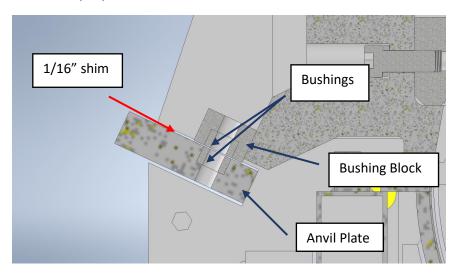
Cross Sectional View of Anvil Plate and Bushing Block (Machine Bolt Removed)
